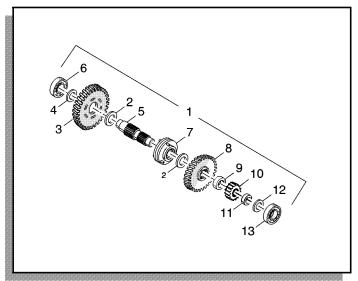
Intermediate Shaft Assembly Reassemble the Differential Carrier Assembly.
